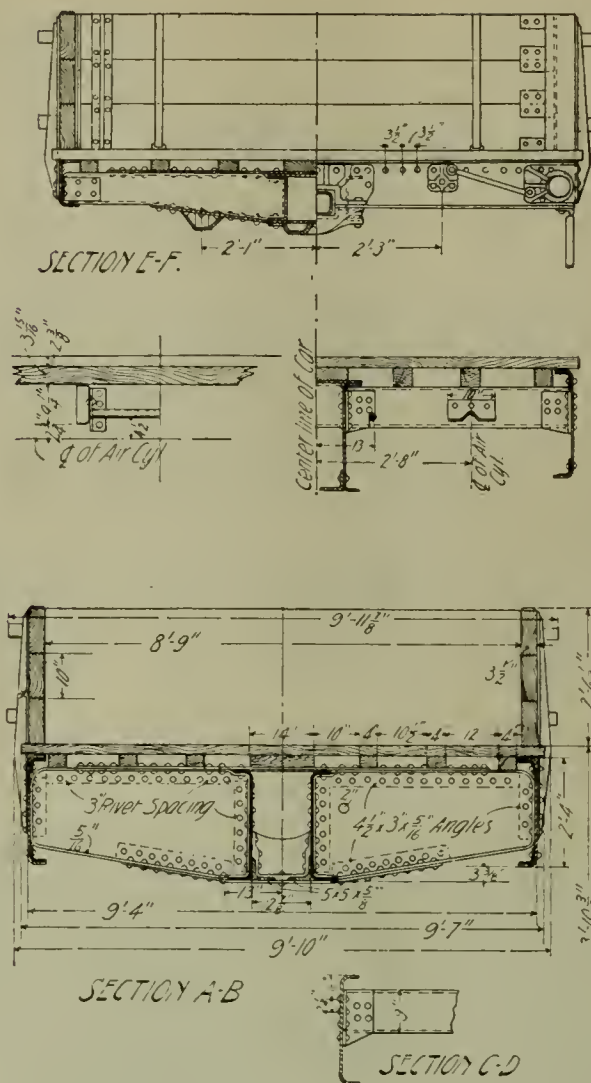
CROSS SECTIONAL VIEWS AND DETAILS.
